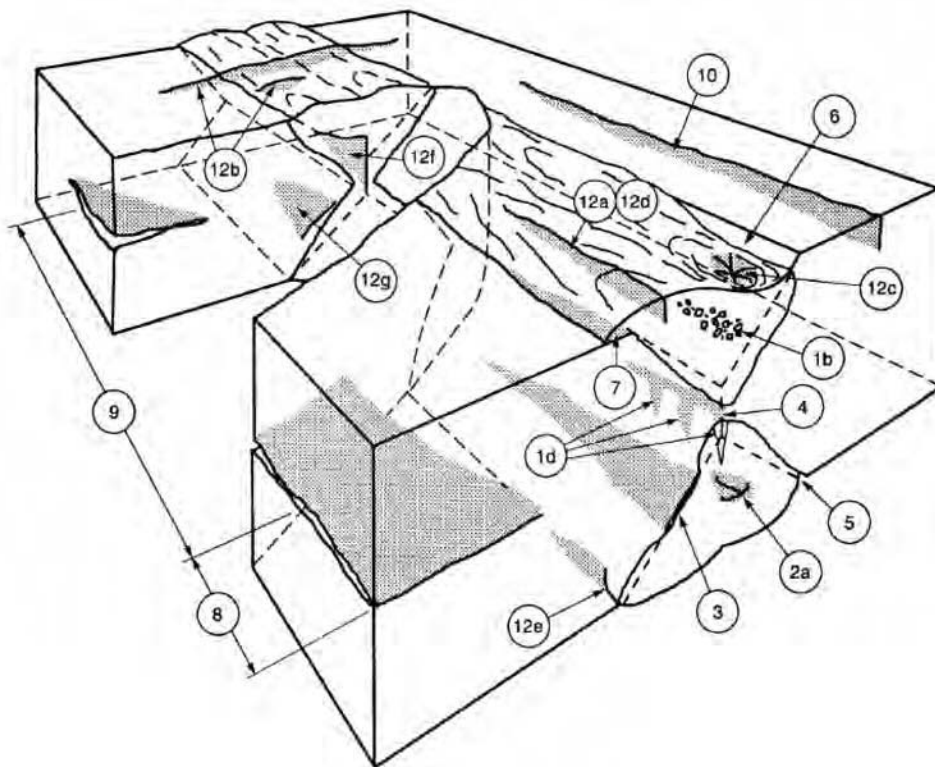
Double V-groove weld in butt joint illustrating weld discontinuities. Numbers in circles refer to Table 3. Source: Ref 45
